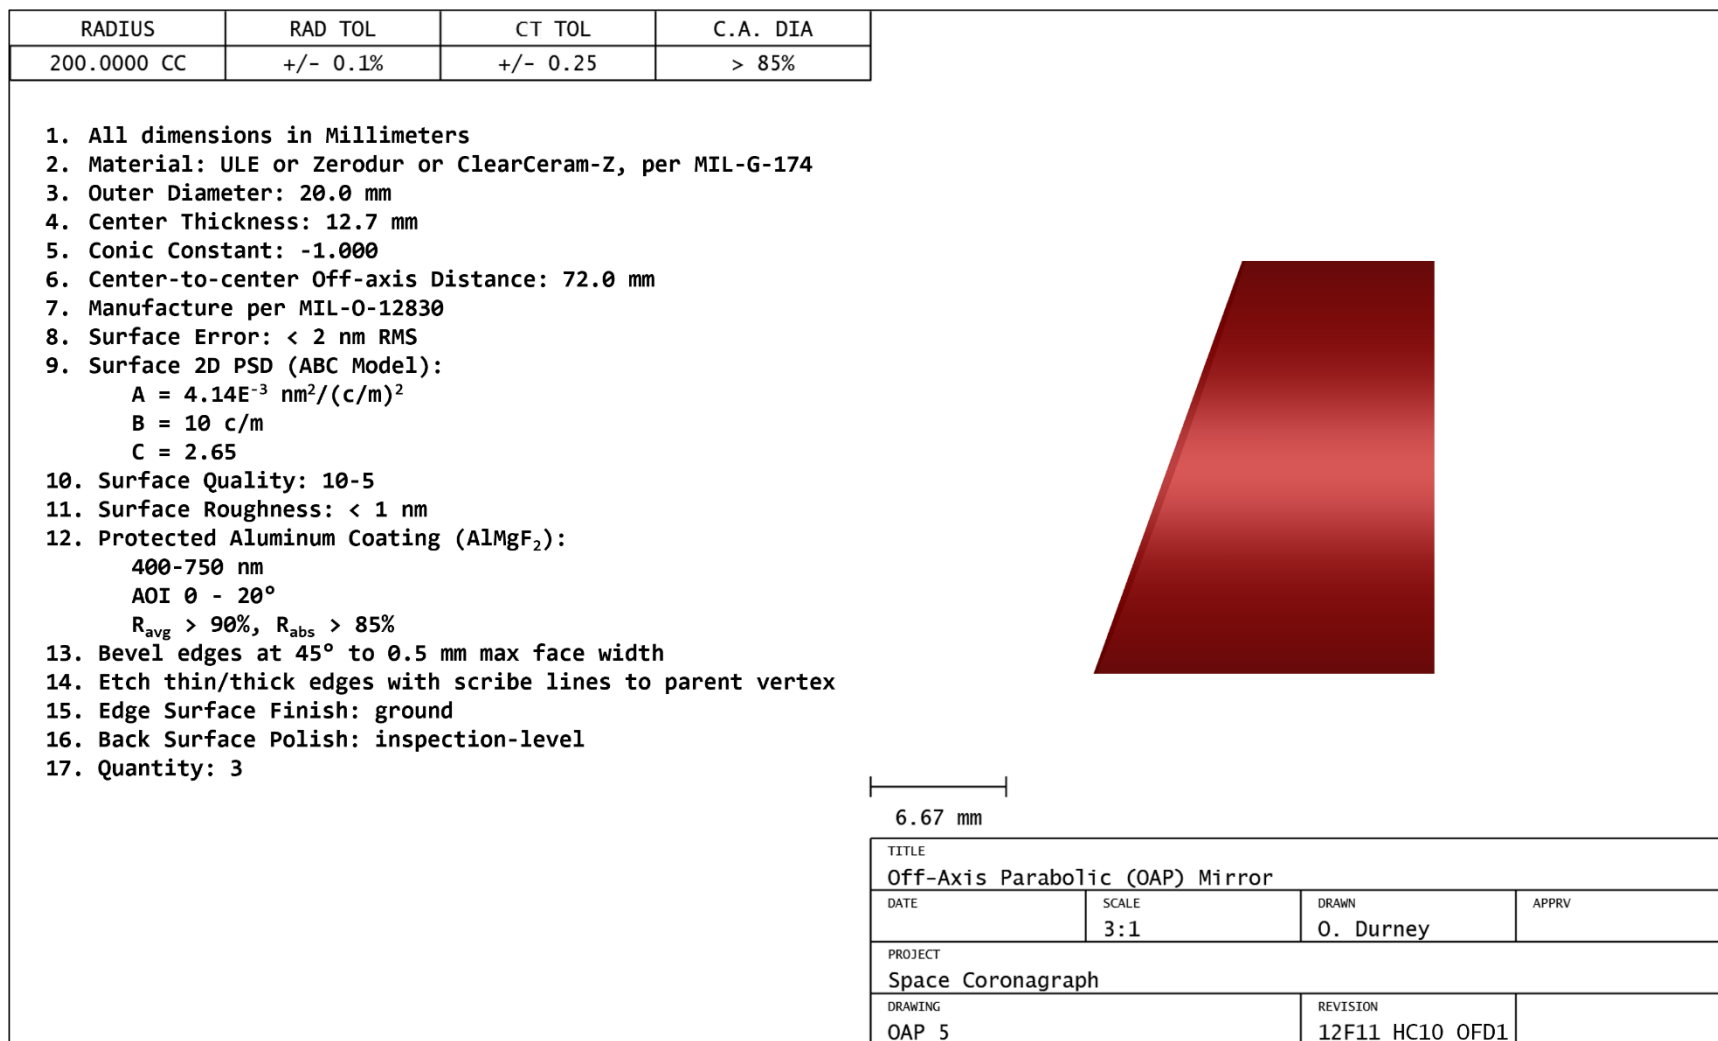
Off-axis parabolic (OAP) mirror 5 drawing
